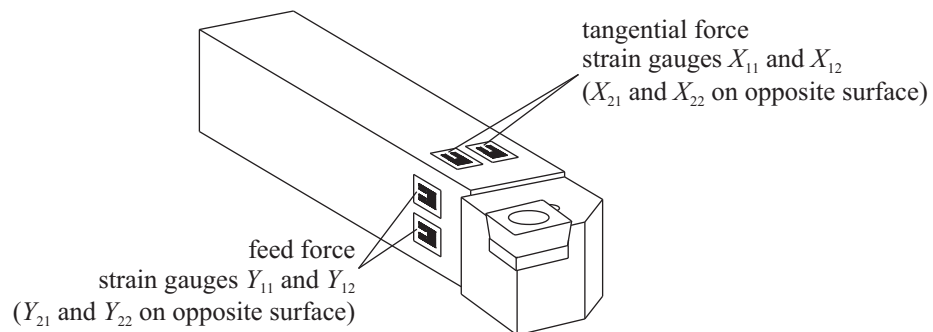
Position of strain gauges on tool holder (front-top view).
